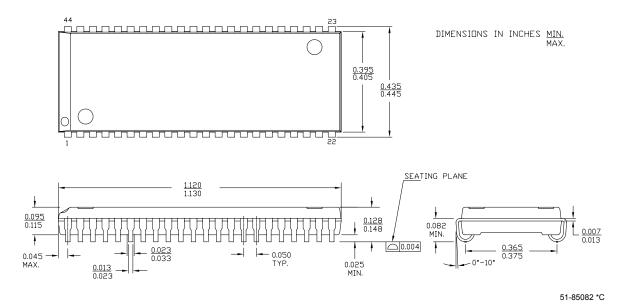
44-pin (400-Mil) Molded SOJ, 51-85082
